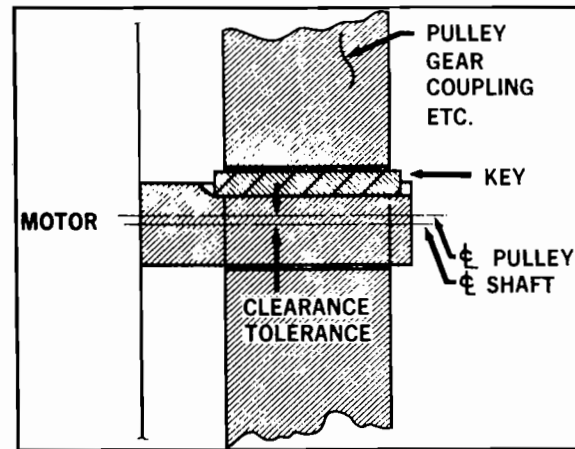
The Take-Up of Clearance Tolerances is a Common Source of Unbalance.
